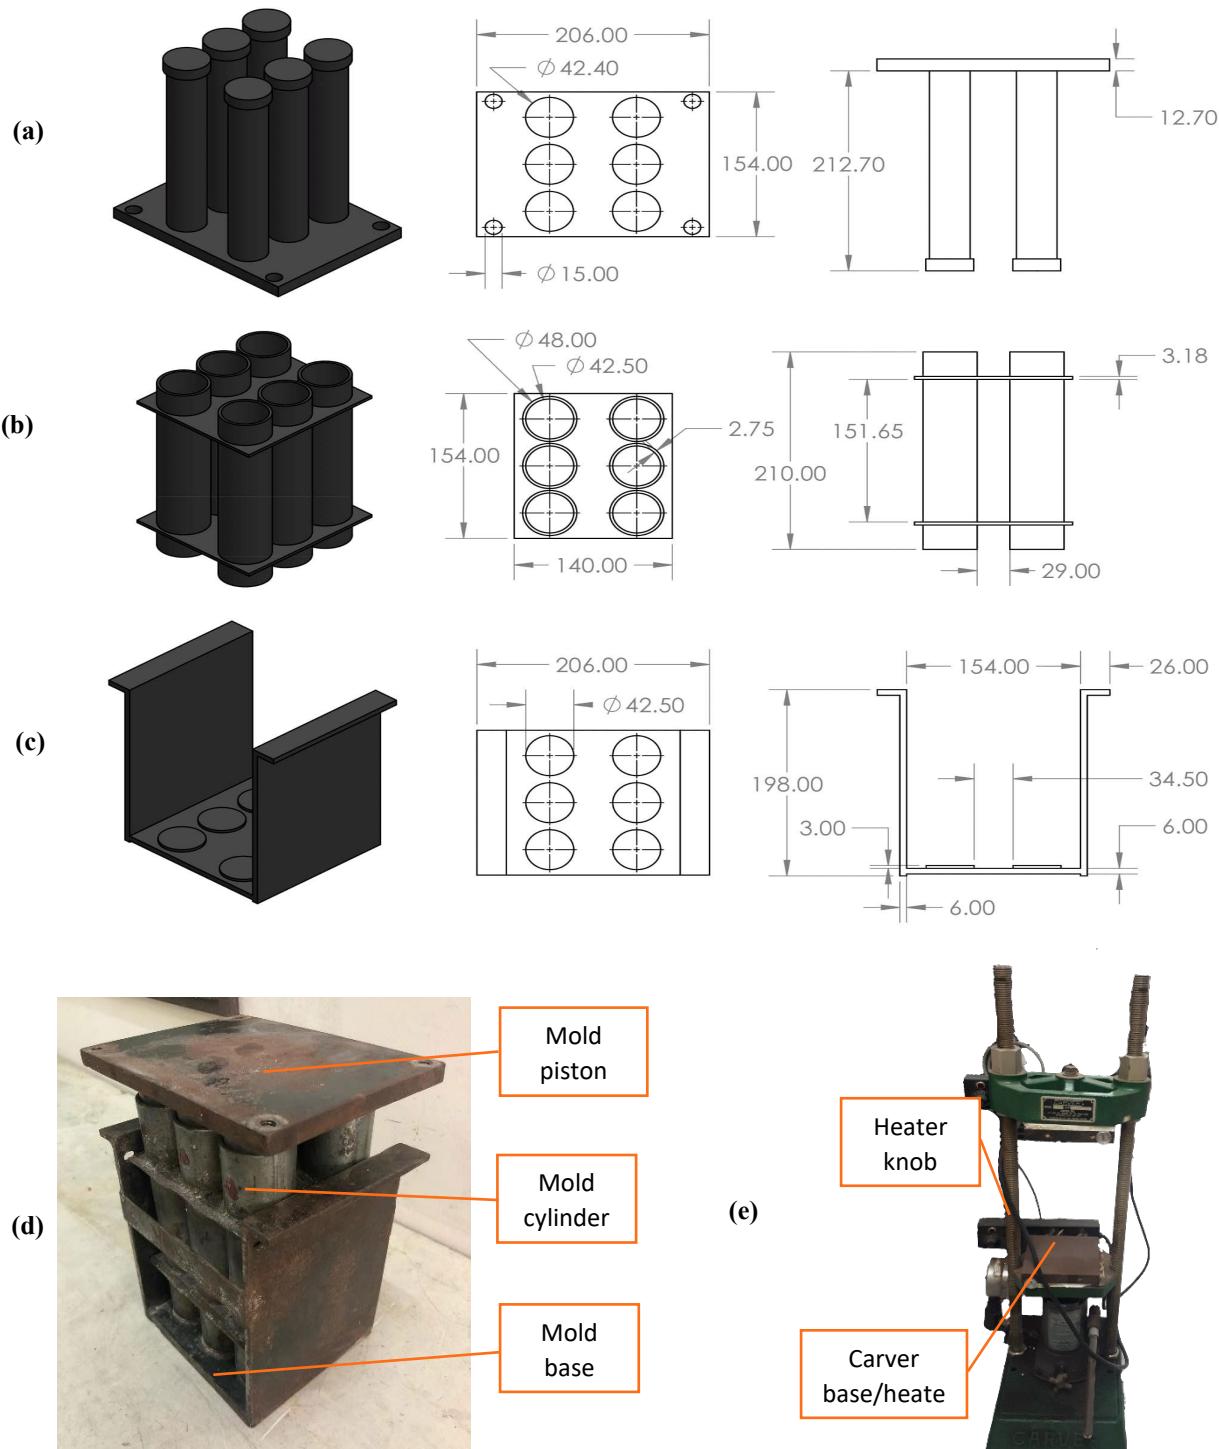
Redrawn schematic diagram based on measurements used for fabrication.: (a) Mold piston isometric, top & front view; (b) 6-cylinder mold isometric, top, & front view; (c) mold base isometric, top, & front view; (d) briquette mold assembly isometric view; (e) Carver press.
